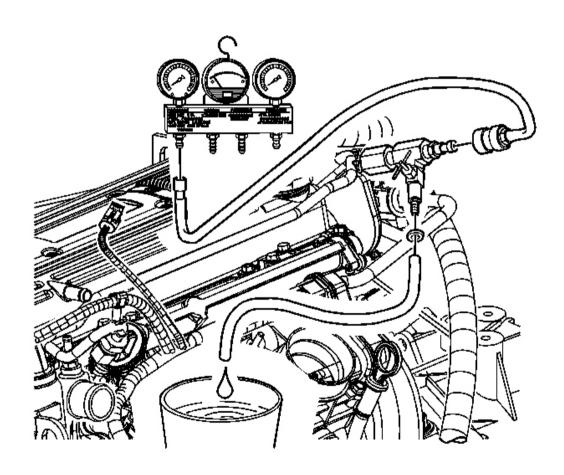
View Of Fuel System Pressure Courtesy of GENERAL MOTORS CORP.
